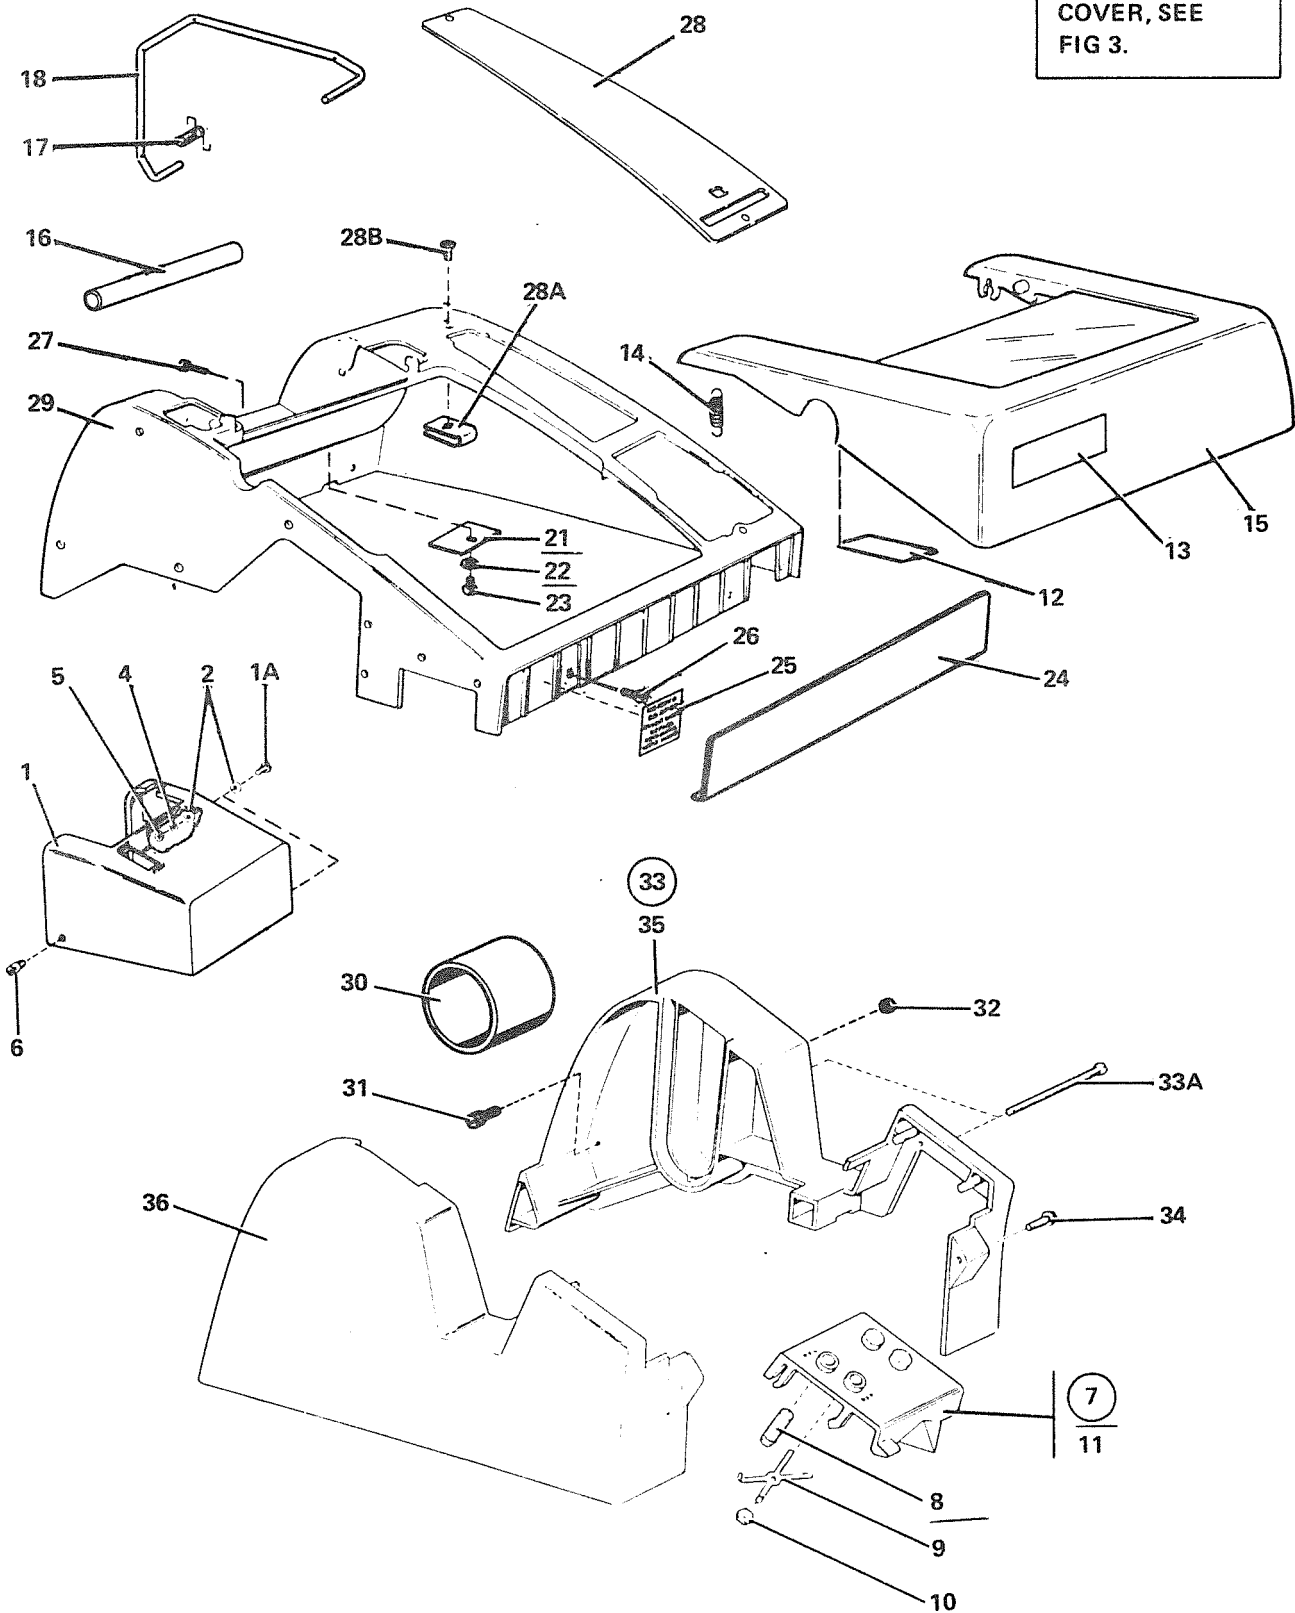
COVER ASSEMBLY. SEE LIST 1.
